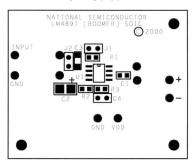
Reference Design Board and PCB Layout Guidelines - MSOP & SO Boards
